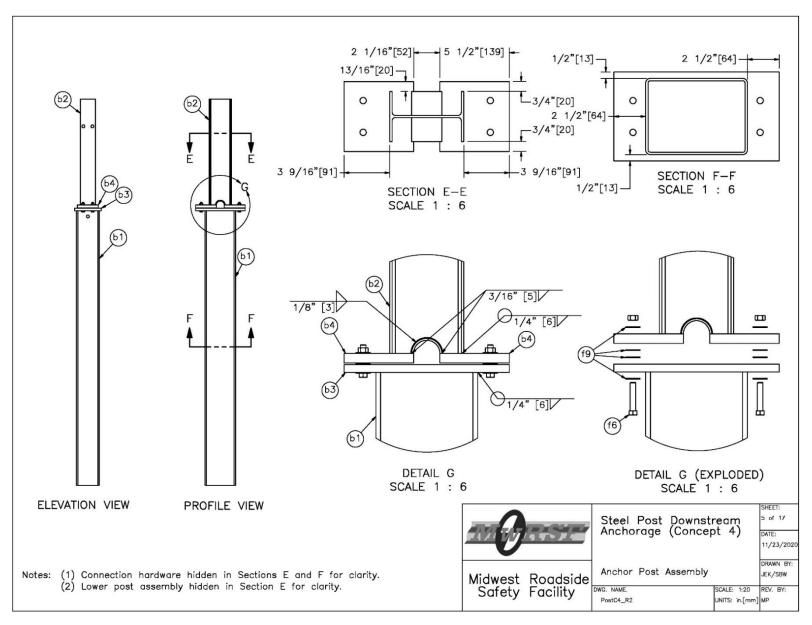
Anchor Post Assembly, Test No. SPDA-4
